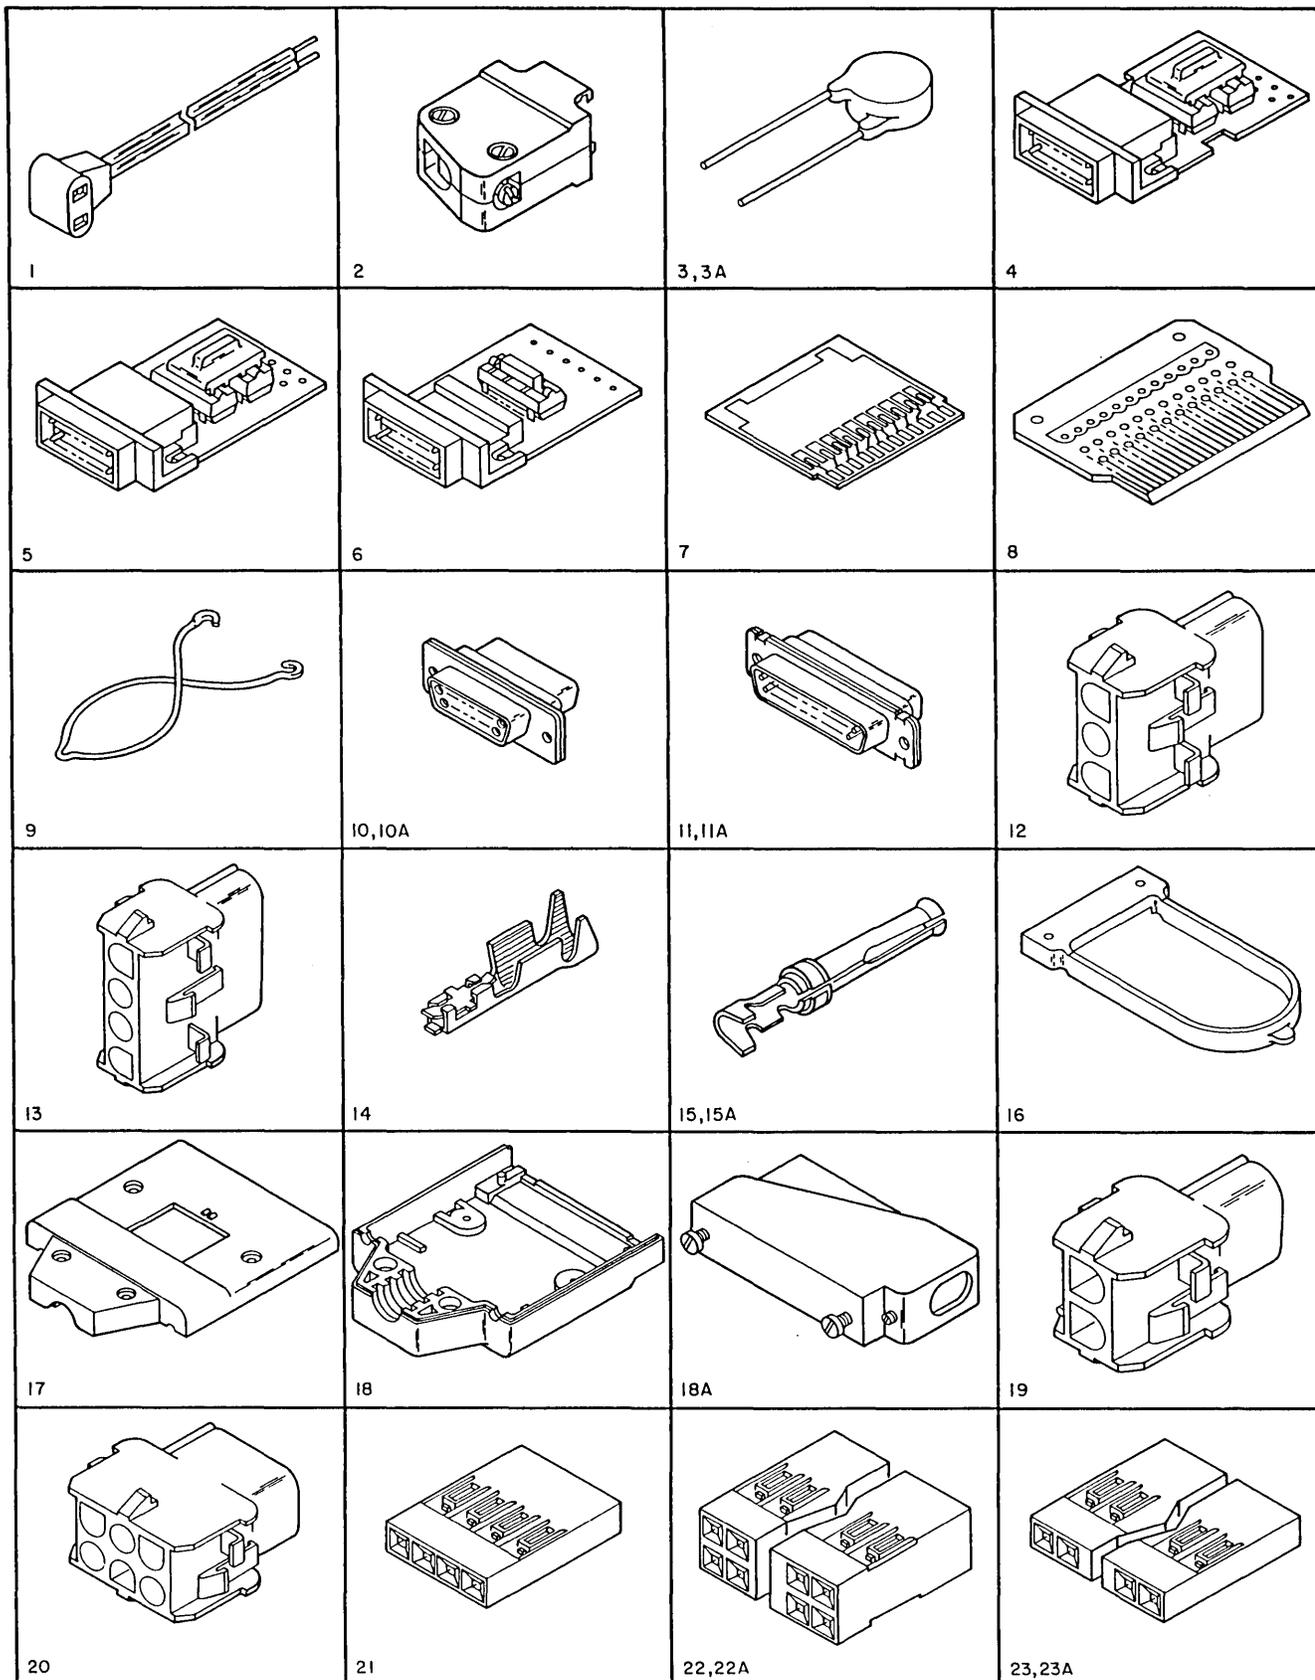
CABLE ASSEMBLIES WITH COMPONENT PARTS (SHEET 1 OF 3, INDEX NOS. 1-23)
